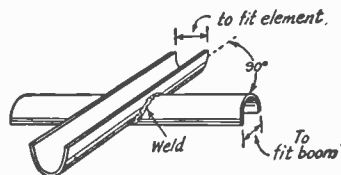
The clamp for the driven element is made by splitting 1-foot lengths of iron pipe and welding them as shown.
